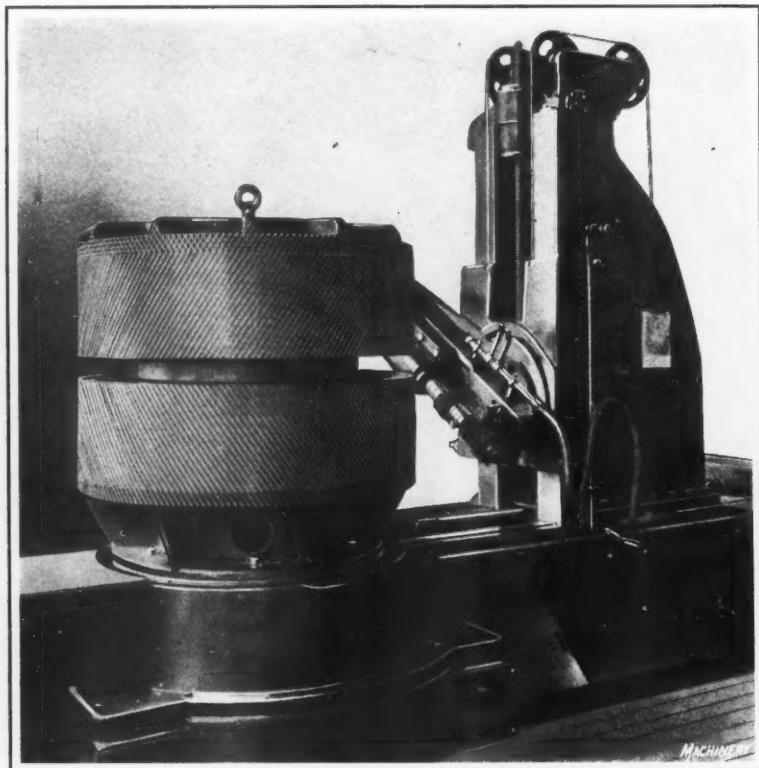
Cutting Herringbone Gears for Steam Turbine Transmission
